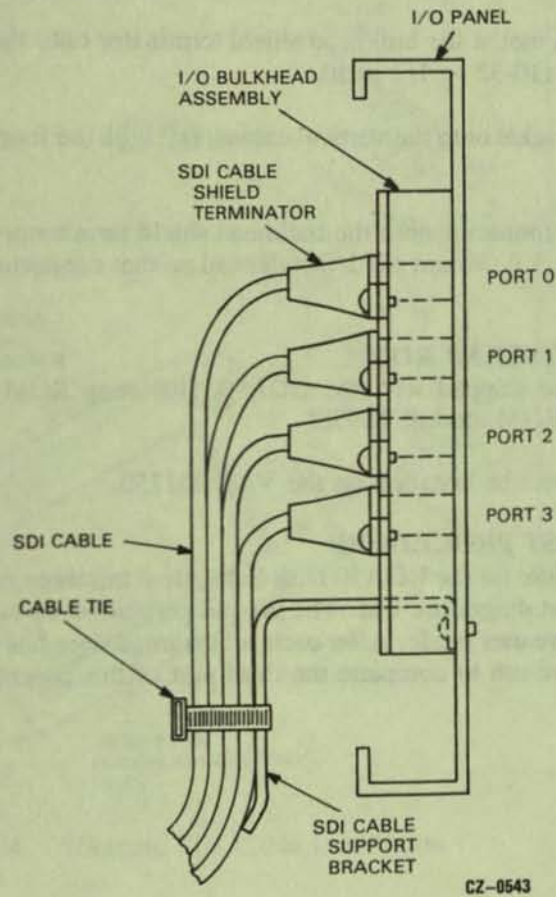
Clamping the SDI Cables to the Support Bracket
